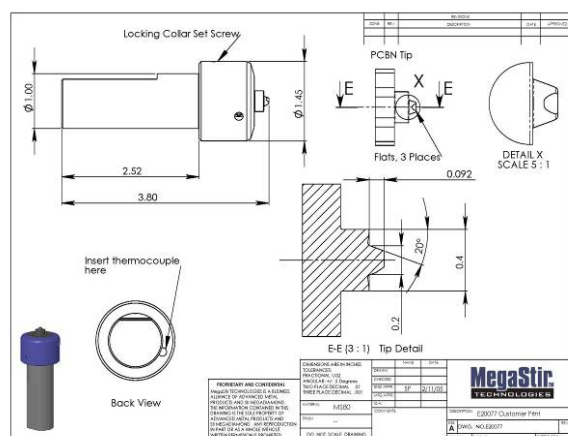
Drawing that illustrates shape of conventional friction-stir pin tool geometry
